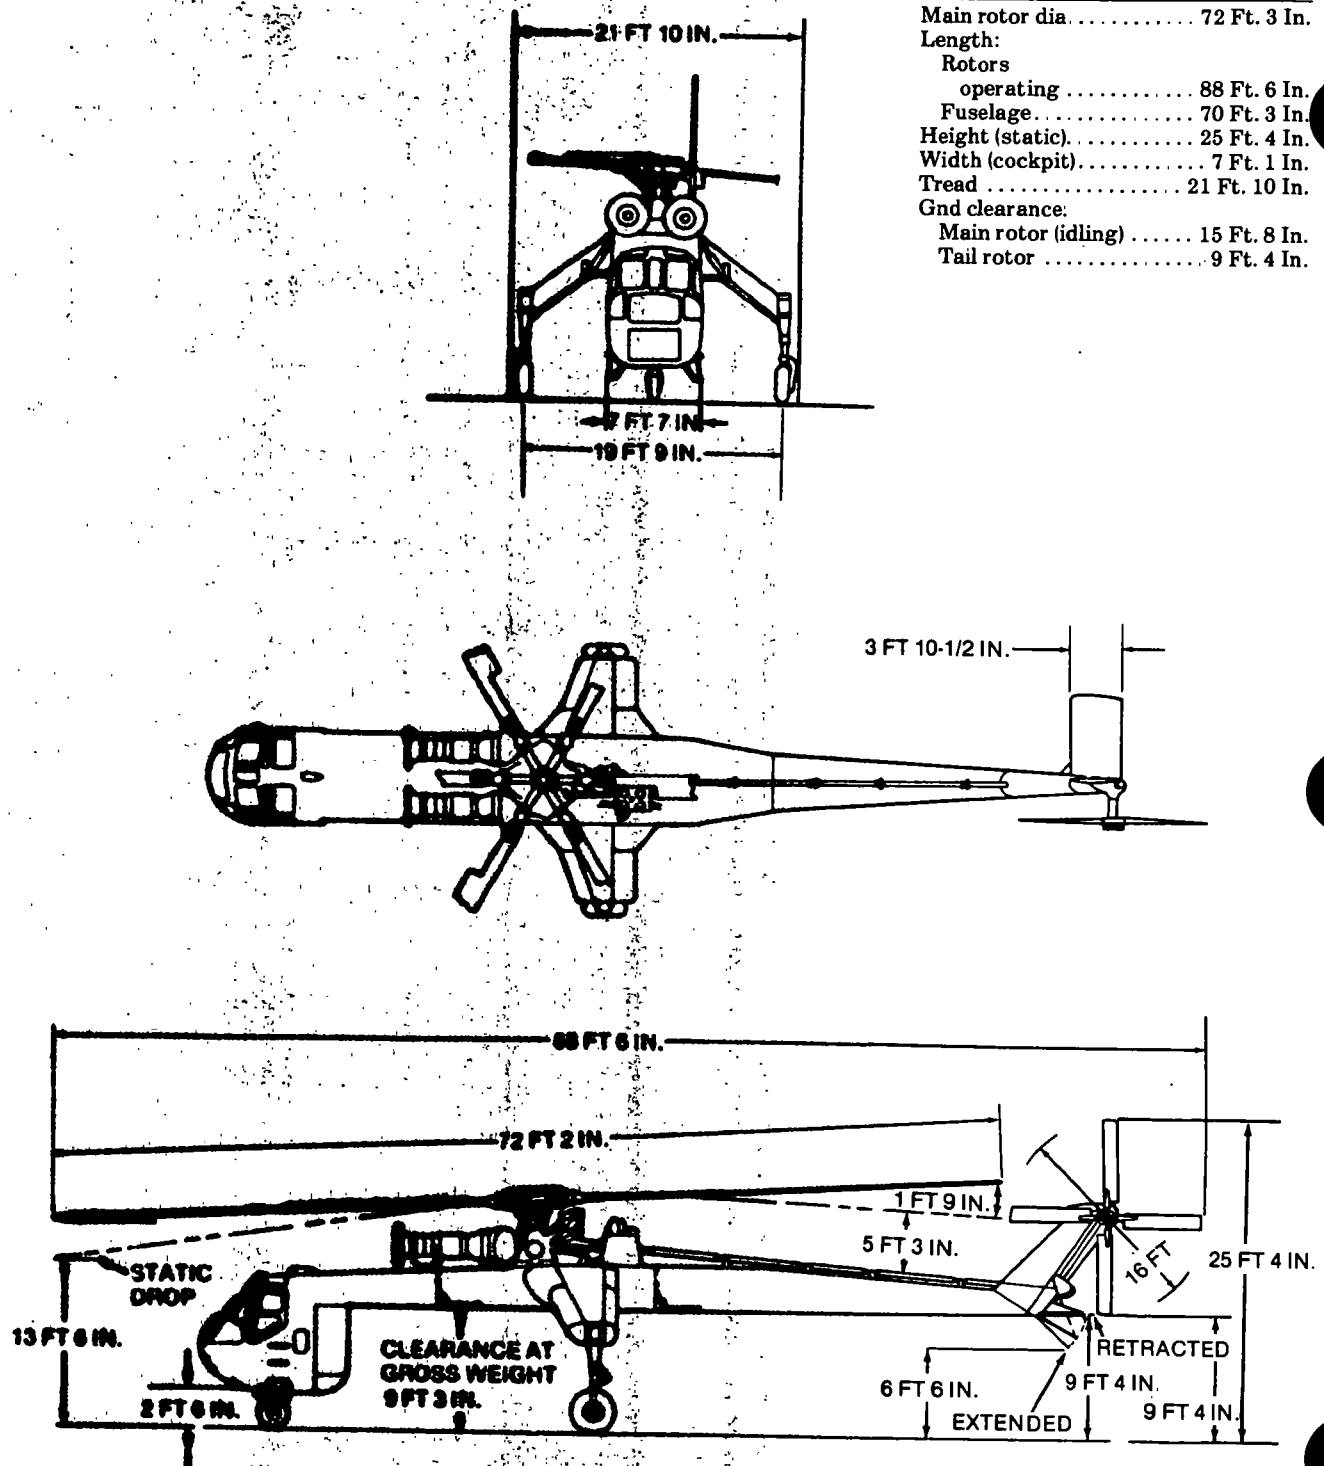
Principal Dimensions, CH-54B (Tarhe)
